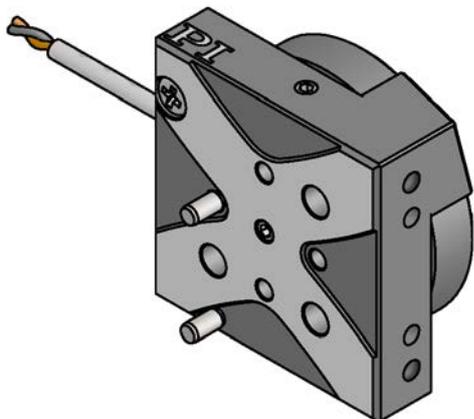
Bottom side of the Q-622: Two of the four available locating holes can be used for alignment on a surface
